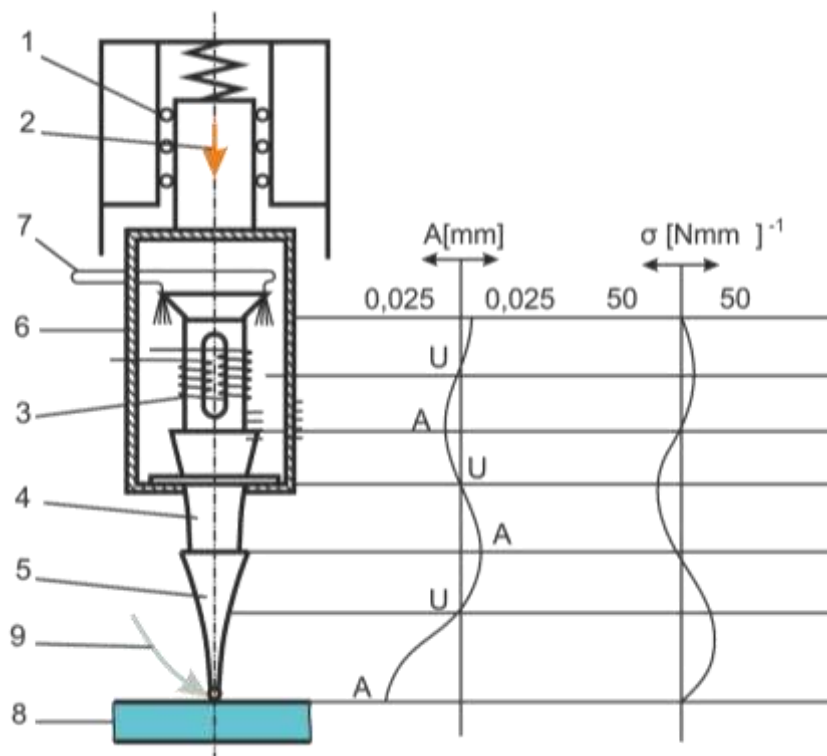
Principle of ultrasonic drilling, electromechanical system, 1 - guiding the whole head in a ball guide, 2 - moving the head hydraulically, servomotor, tongue or weight, 3 - converter, 4 - through cone, 5 - attachment, 6 - housing, 7 - water spray, 8 - drilled glass, 9 - supply of abrasive suspension, A - anti-node distribution, U - node distribution,  $\sigma$  - mechanical stress distribution
